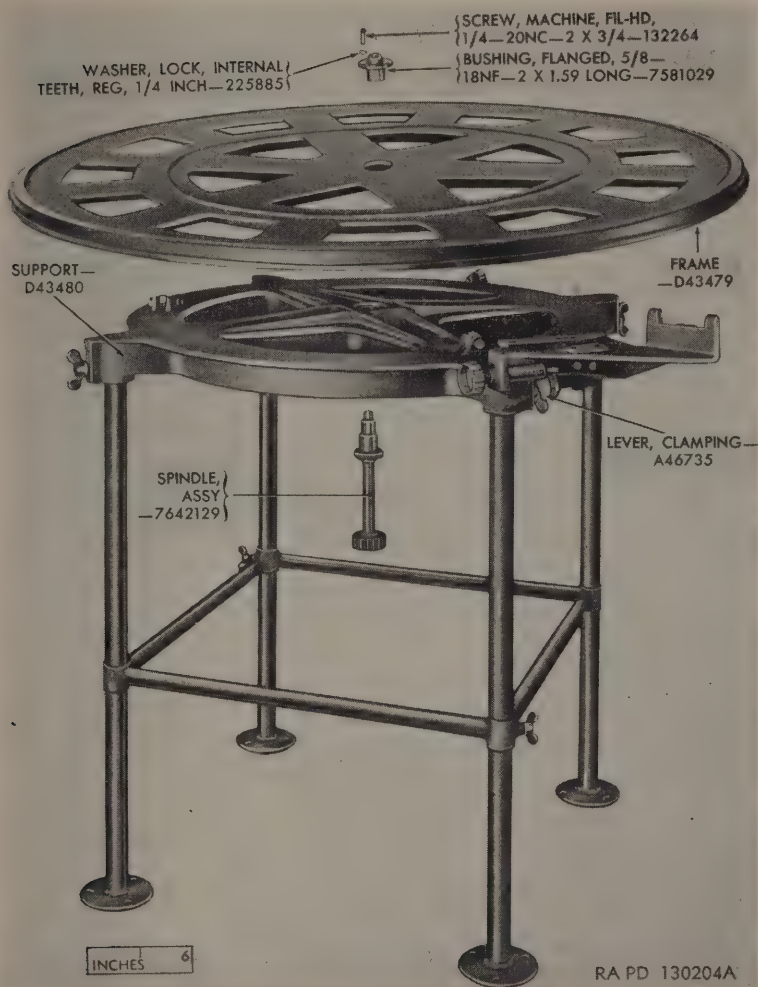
Removal of frame from support—plotting boards M5 and M5A2.
